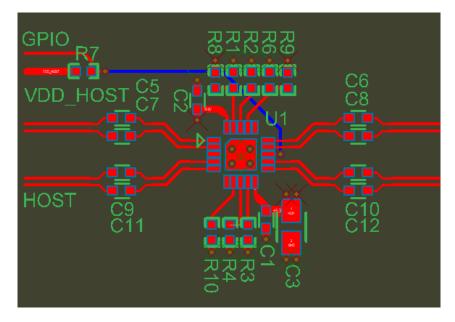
Typical Layout Routing of PI3EQX6741SLZDE
